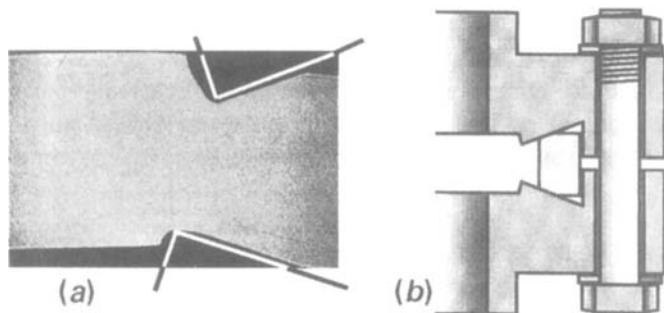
(a) Distortion in a copper gasket caused by uneven thermal expansion of the flange, or weld-induced distortion of the knife-edge flanges. Adapted with permission from *J. Vac. Sci. A*, 5, 2540, W. Unterlerchner. Copyright 1987, AVS–The Science and Technology Society. (b) A taper gasket designed for use in the ConFlat knife-edge flange; Reprinted with permission from *J. Vac. Sci. Technol. A*, 19, 2963, S. Kurokouchi, S. Morita and M. Okabe. Copyright 2001, AVS–The Science and Technology Society.
